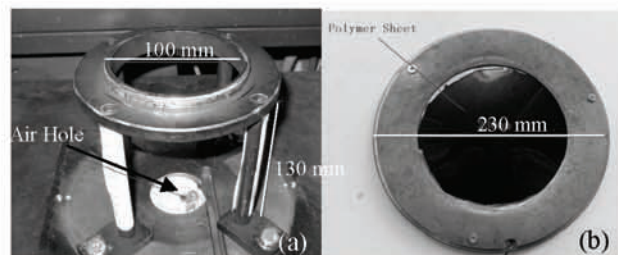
(a) Open ring mold. (b) Polymer sheet frame.
